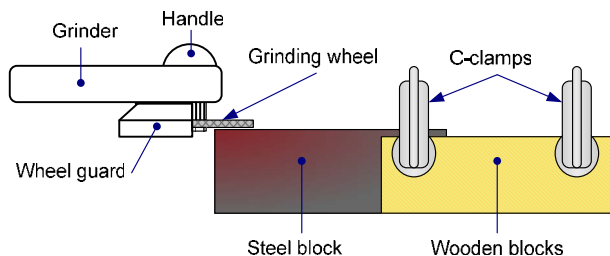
Test jig for supporting a steel block to steel structure to constrain motion.
